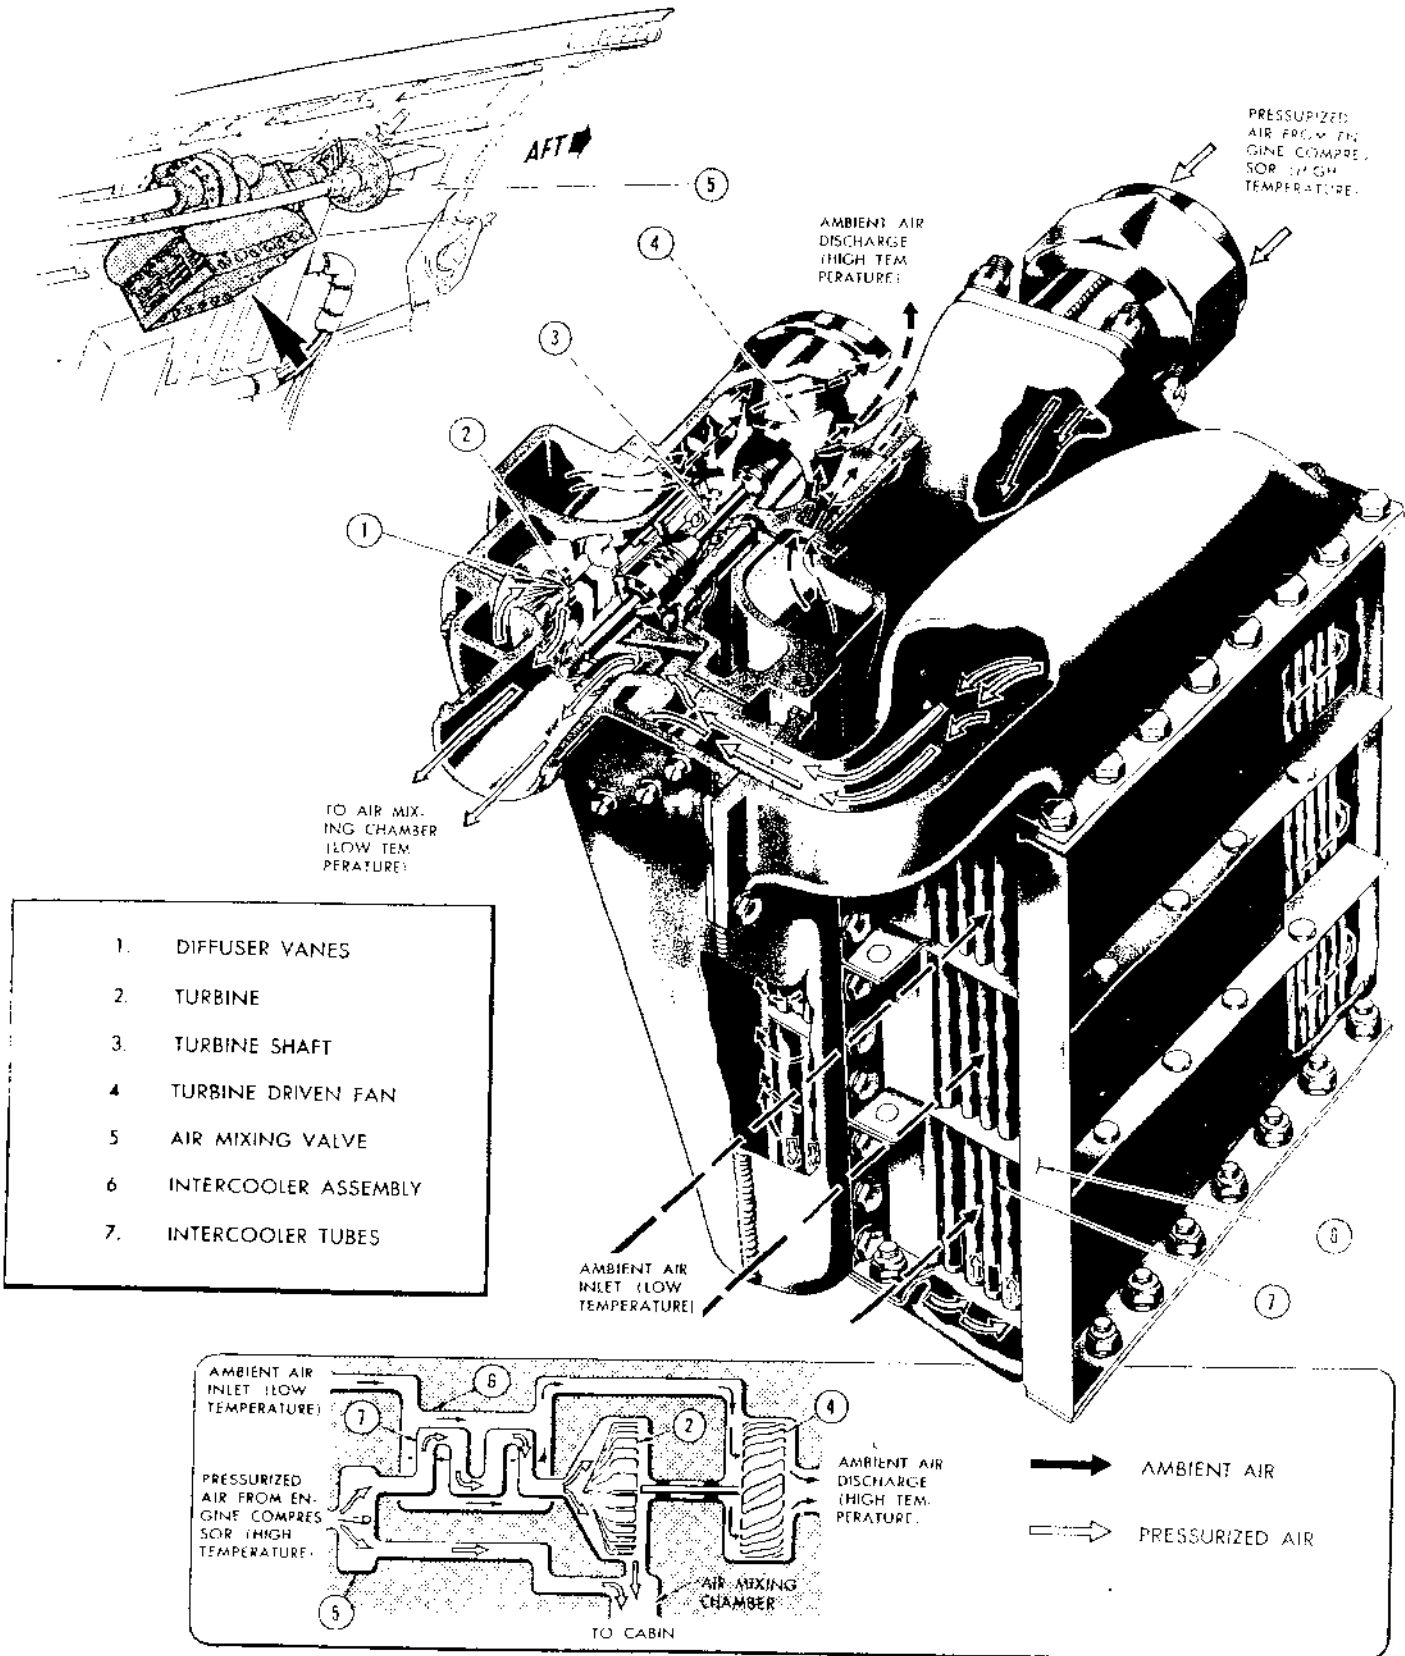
B — Air Turbine and Cooler Assembly, P-80A-10 and FP-80A-10 Airplanes Only
